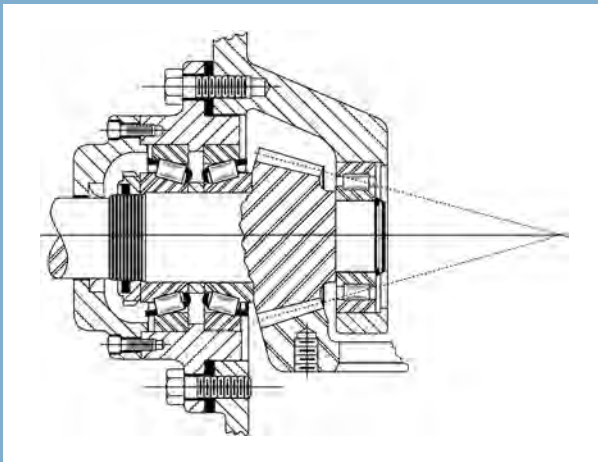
Straddle pinion mounting for short shafts showing use of combined thrust and radial bearings. Gear mounted in oil-tight case.
